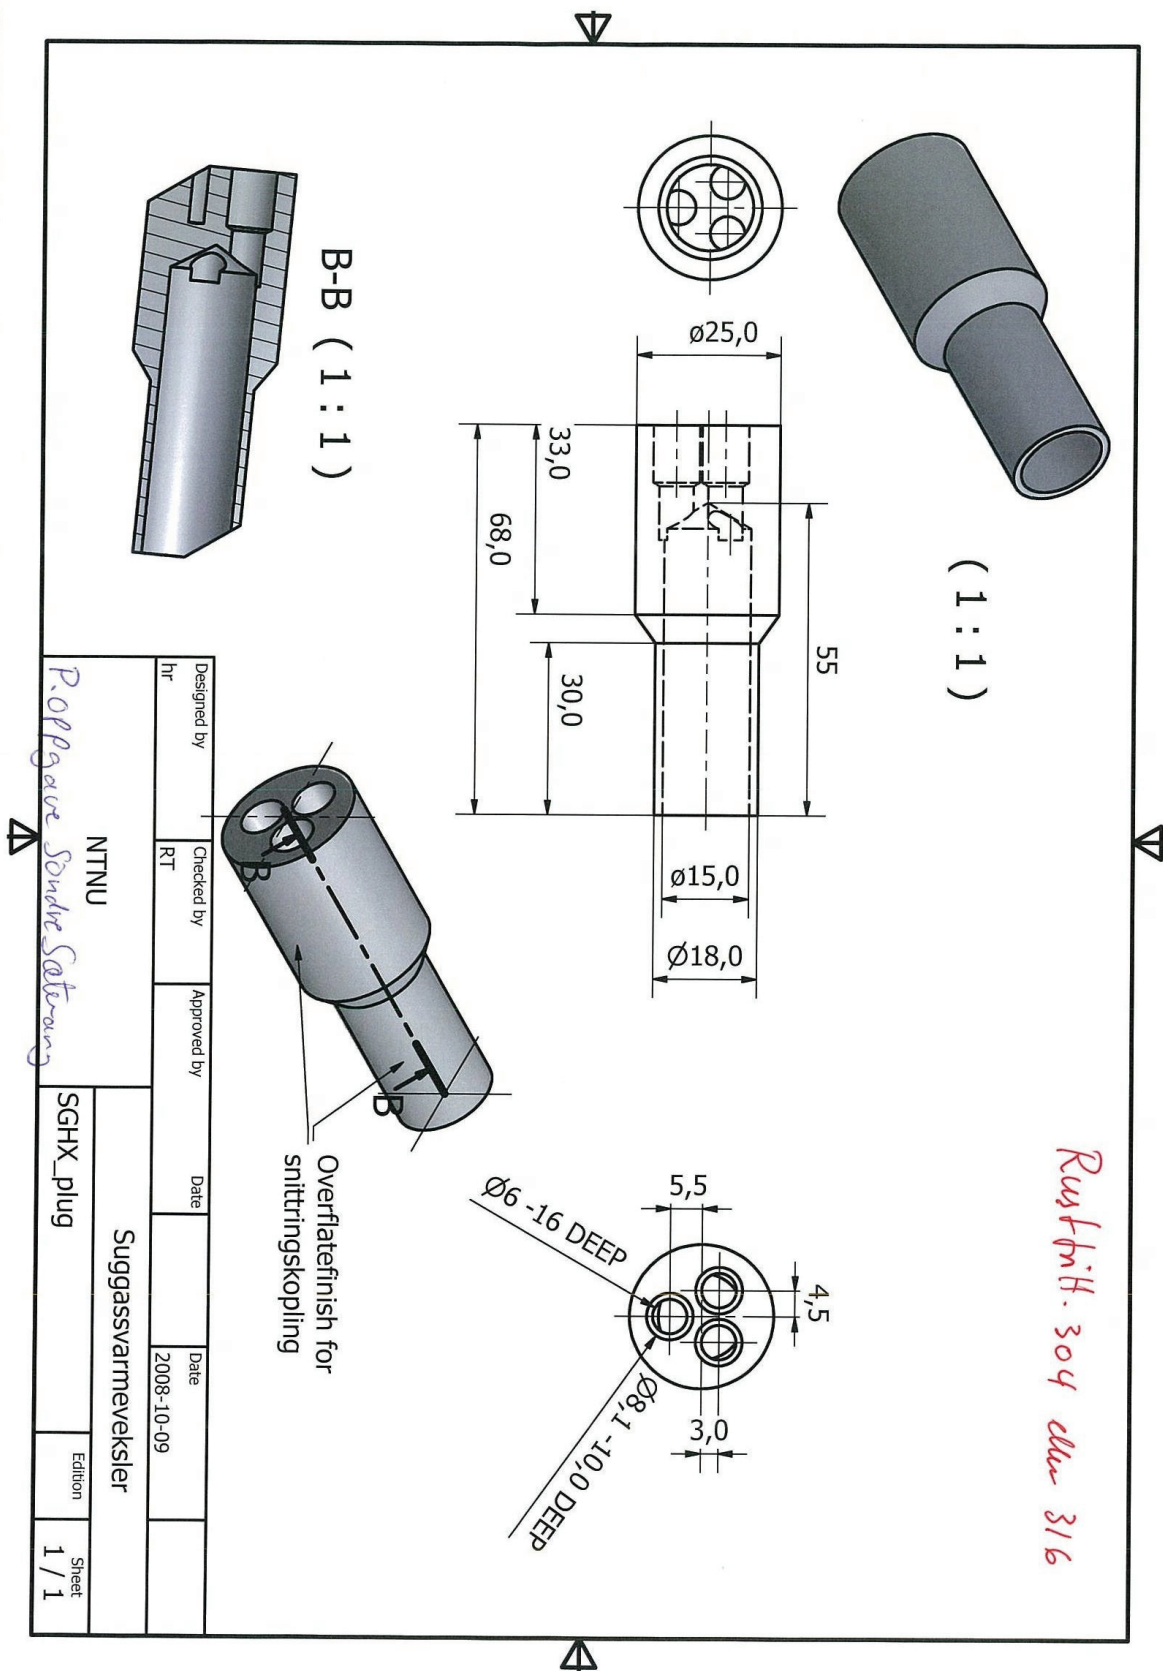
CAD drawing of part used to mount the SGHX to the existing piping.
